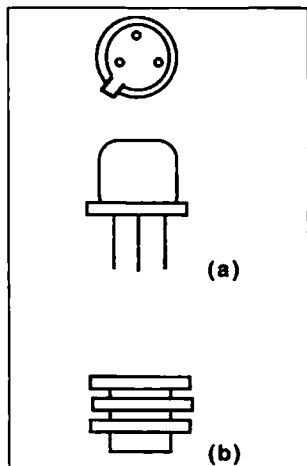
a) TO-5 transistor package; b) TO-5-style top-hat heat sink.
